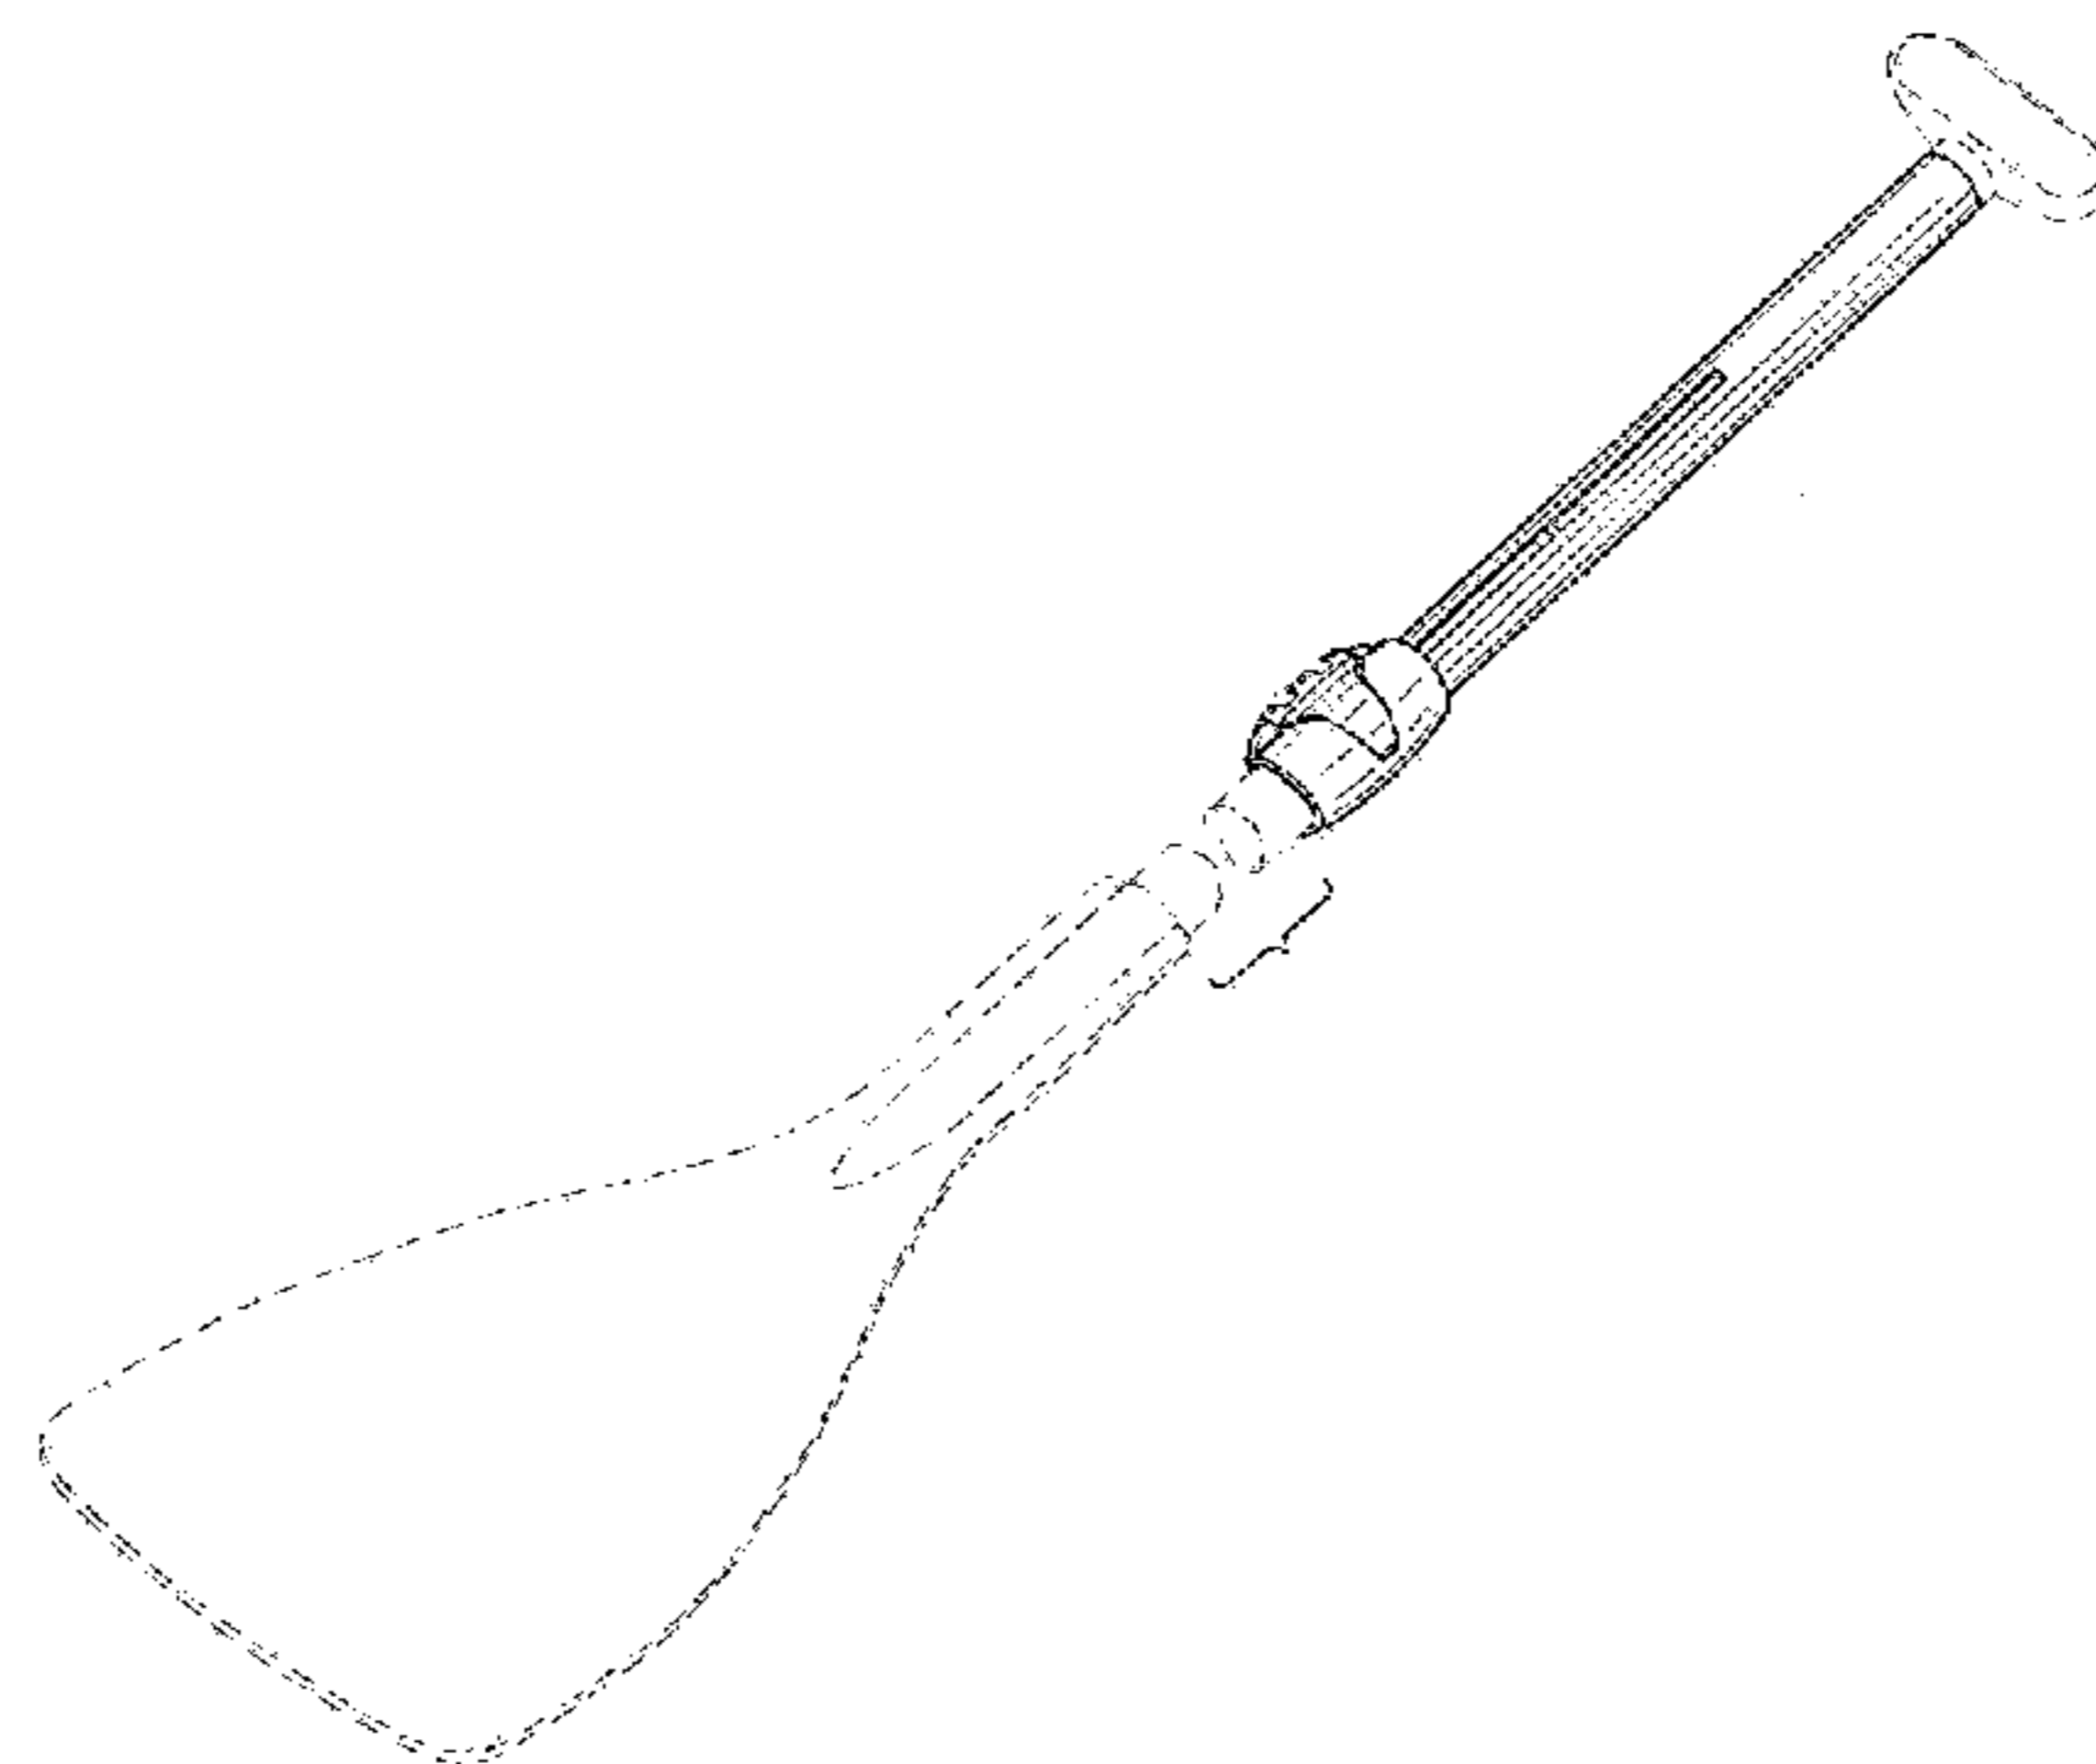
is a perspective view of the adjustable paddle shaft of our new design from the front top;
